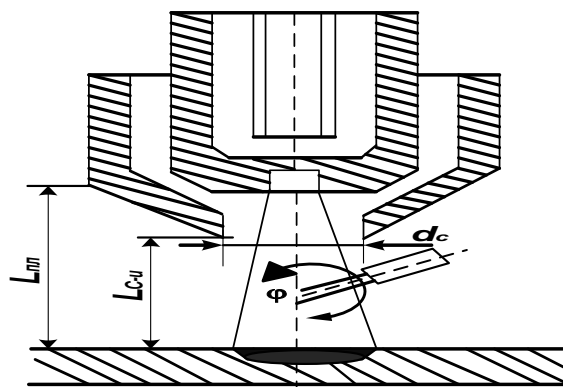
Scheme of the Plasma Welding Process in CO_2 .
